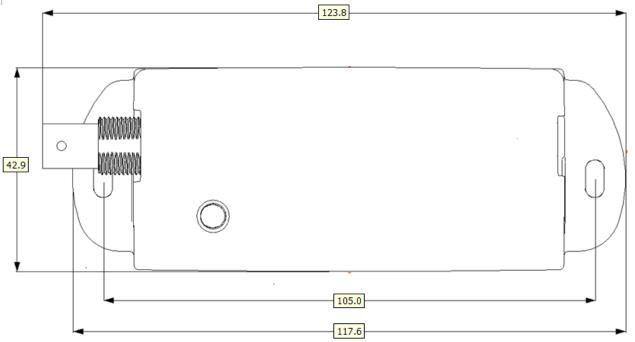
LDSBus ORP Sensor Adapter Dimension – Top View
